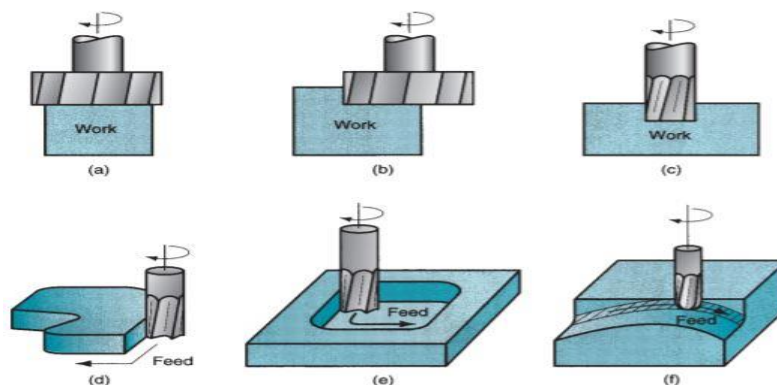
(a) conventional face milling, (b)partial face milling, (c) end milling, (d) profile milling, (e) pocket milling, and (f) surface contouring [10].
